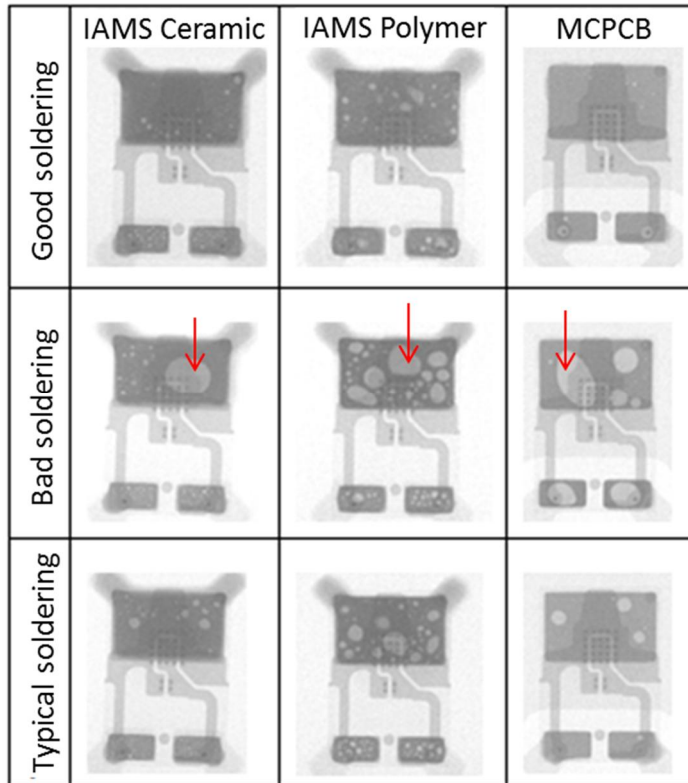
X-ray image of good soldering, bad soldering and typical soldering of each board type. The largest void in the thermal contact is indicated by a red arrow. (Paper III)
